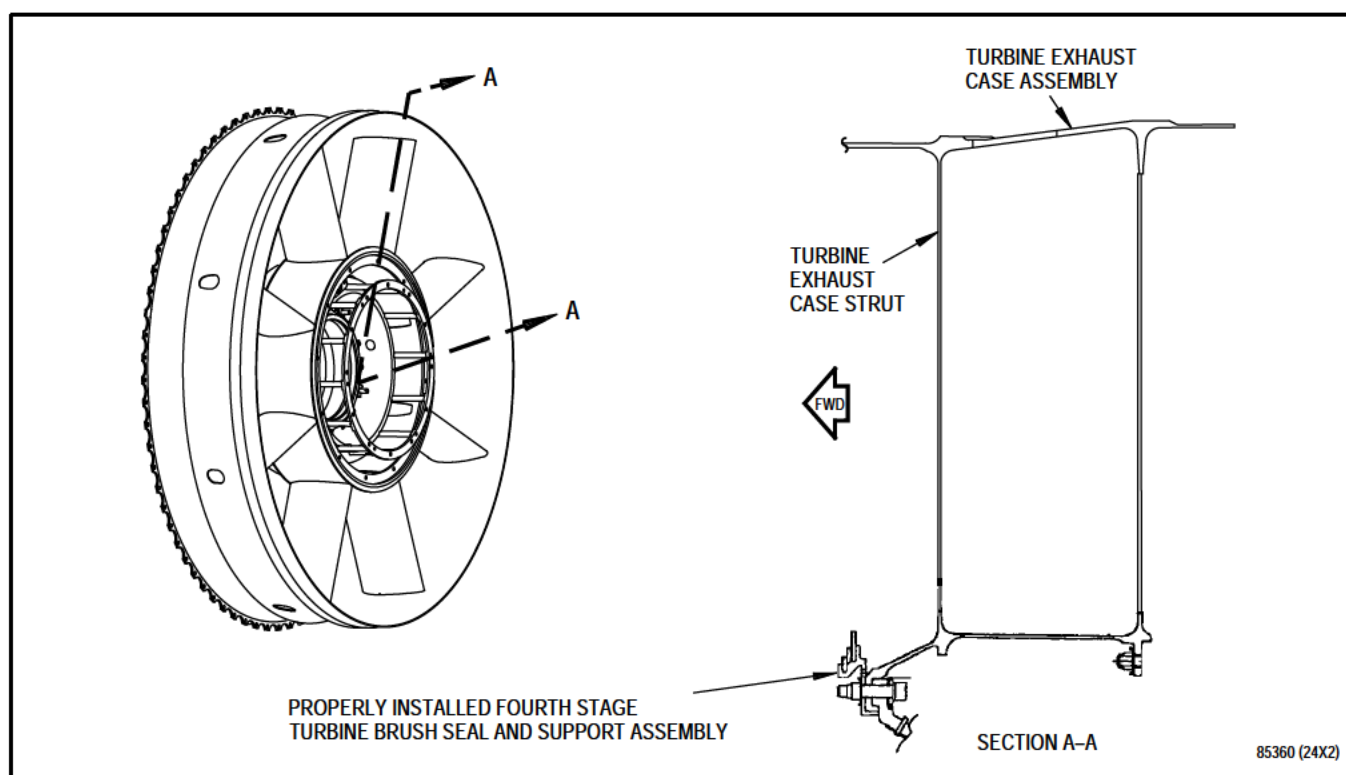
Fourth Stage Turbine Brush Seal and Support Assembly - Installation
